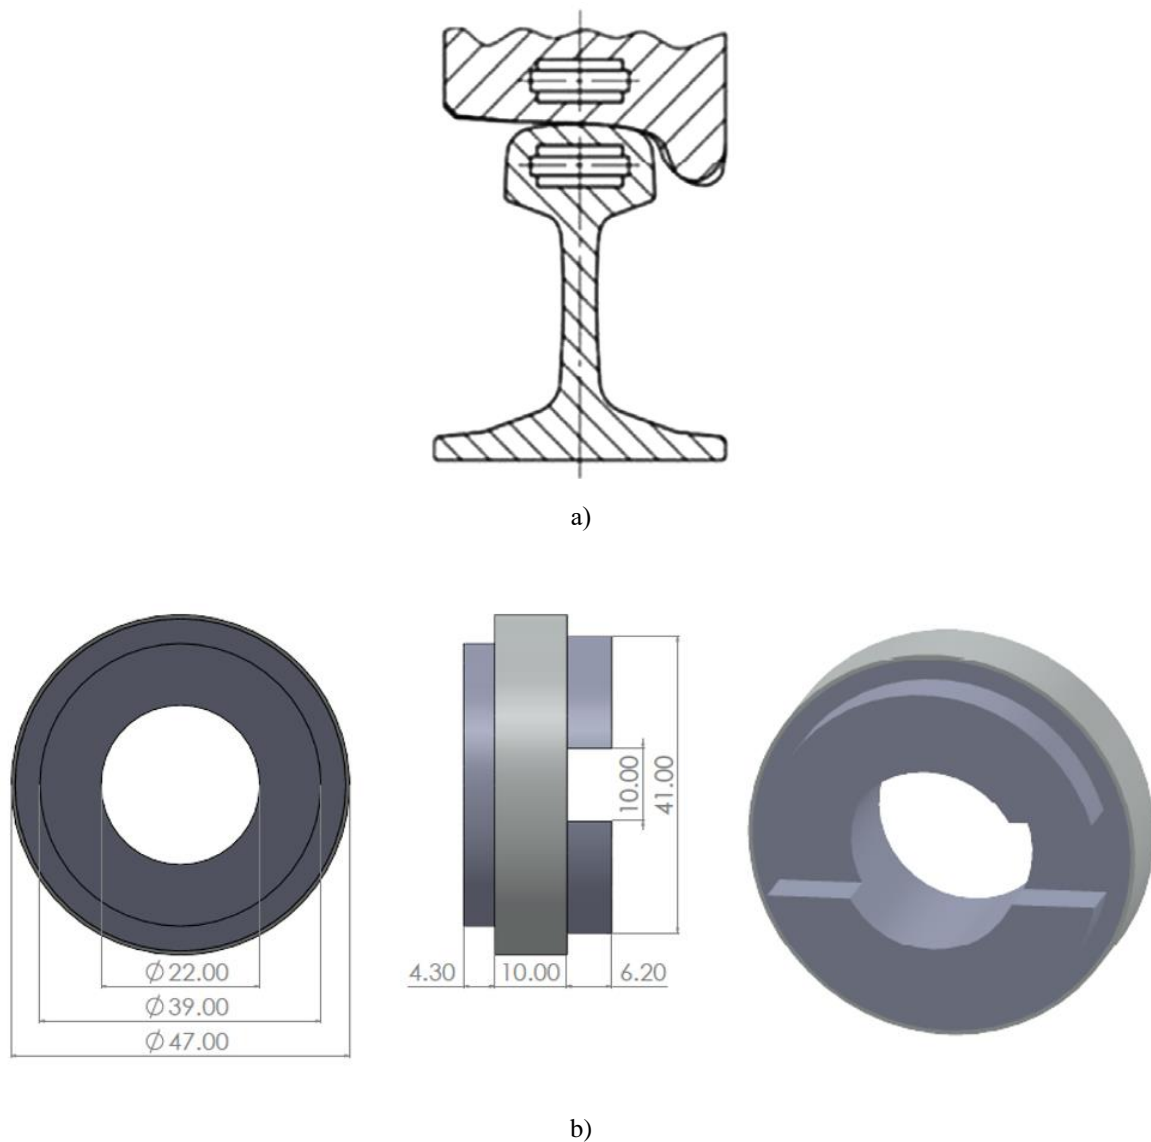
(a) Twin disc rail and wheel sample extraction locations from actual rail and wheel (Lewis et al., 2014): (b) Clad rail disc dimensions
